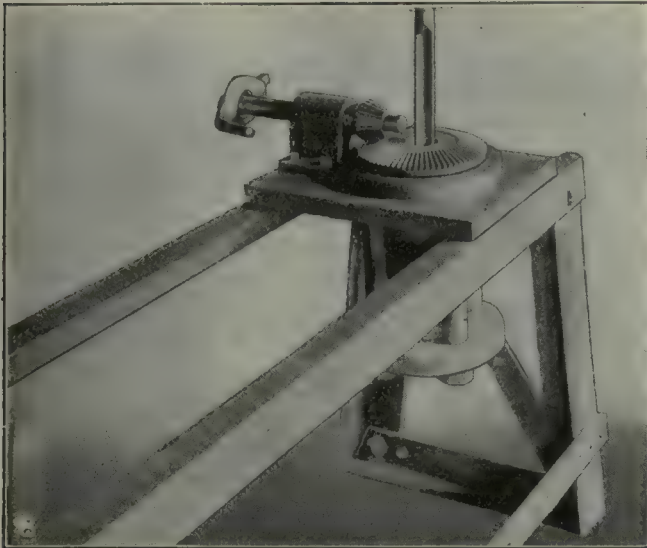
MACHINE FOR TWISTING DRILL BLANKS
